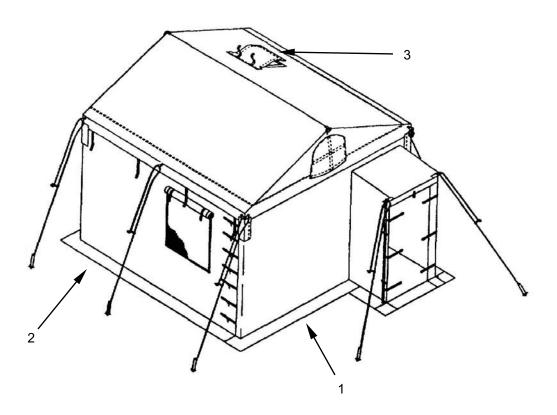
Fabric Wall Assemblies Installation (Type I Shown).
